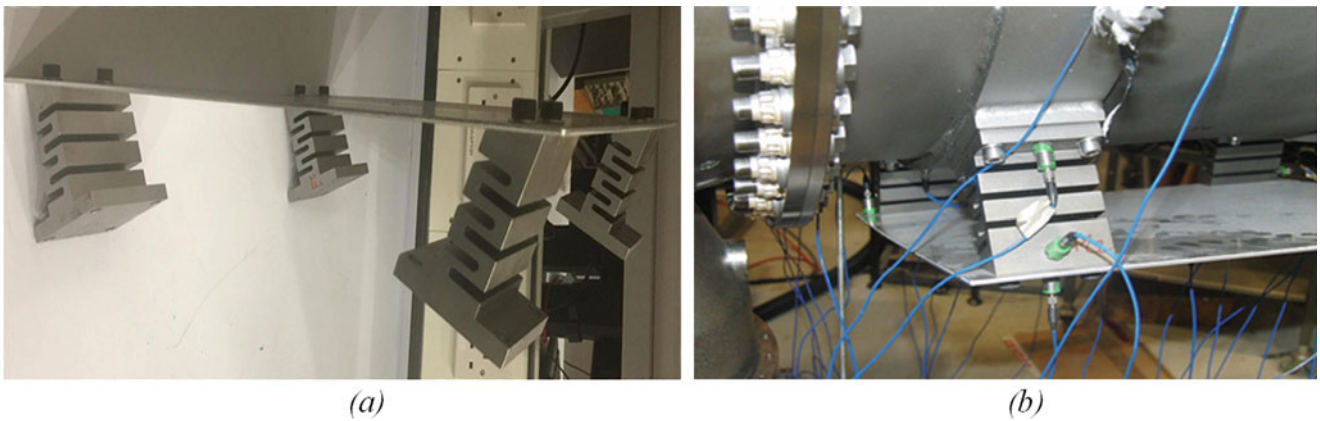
Assembly of the casing with an aluminium plate for nonlinear investigation. (a) (Aluminium plate), (b) (casing and plate assembly)
